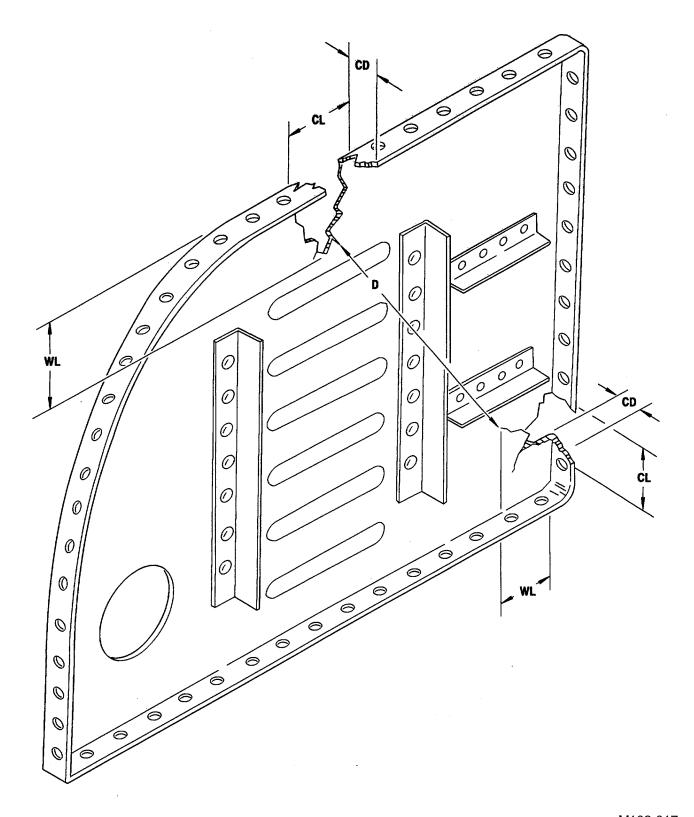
Evaluating Damage to Built-Up Sheet Metal Bulkheads
